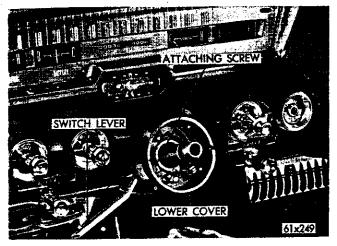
Directional Switch and Lever— Steering Wheel Removed
